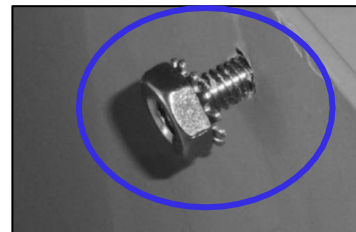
1/2 inch screw inserted in the top hole of the mounting plate
